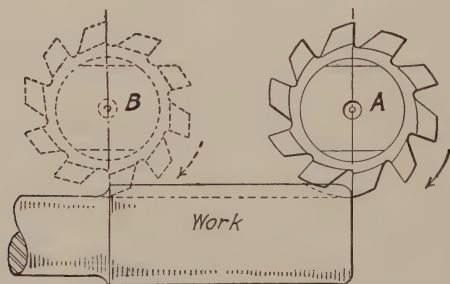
A, cutting full depth of groove; B, end of cut. The feed trip should be set to operate when the axis of the cutter is directly over the shoulder.
